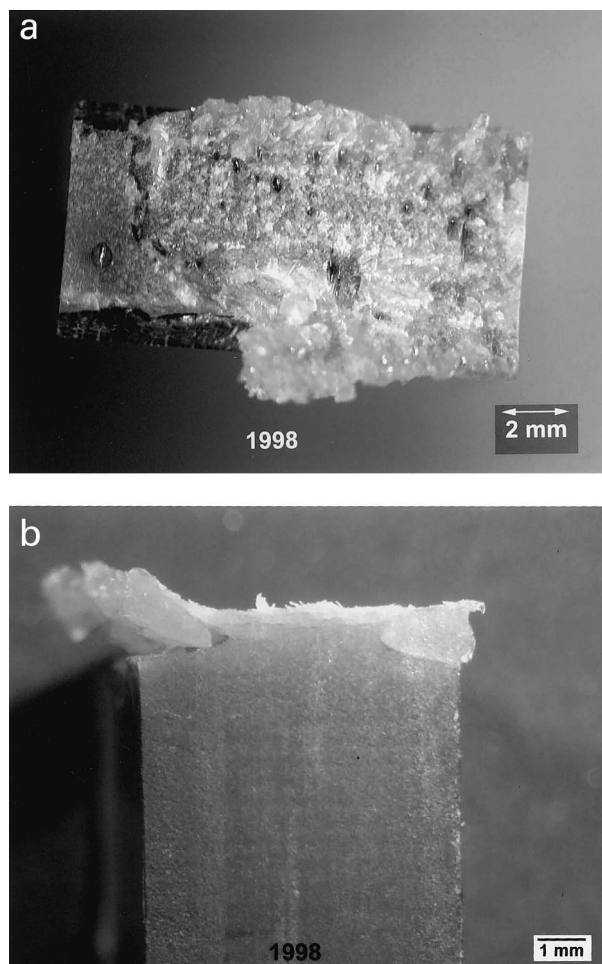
Fracture surfaces of 6.2-mm-thick PEI specimens for hot-tool weld made at  $T_H = 395^\circ\text{C}$ , a heating time of 20 s, melt and weld penetrations of 0.13 and 0.91 mm, respectively, and a seal time of 10 s. (a) Top view, and (b) side view.
